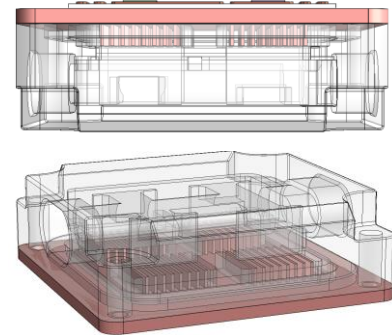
CAD drawing of the final power module and cold plate design. The fluid manifold is shown transparent.
